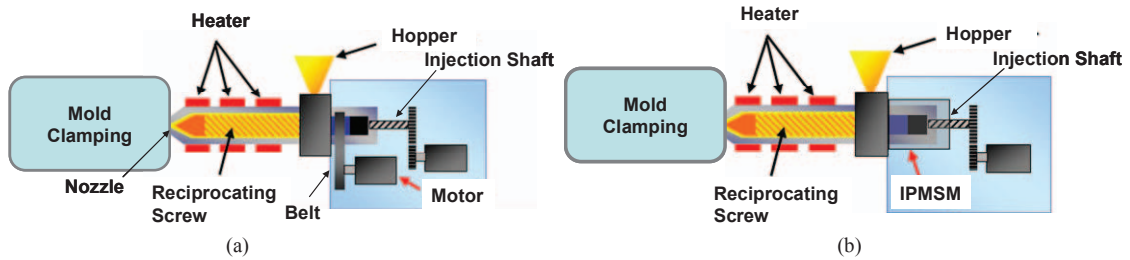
Injection molding machine: (a) In-direct drive configuration, (b) Direct drive configuration.
